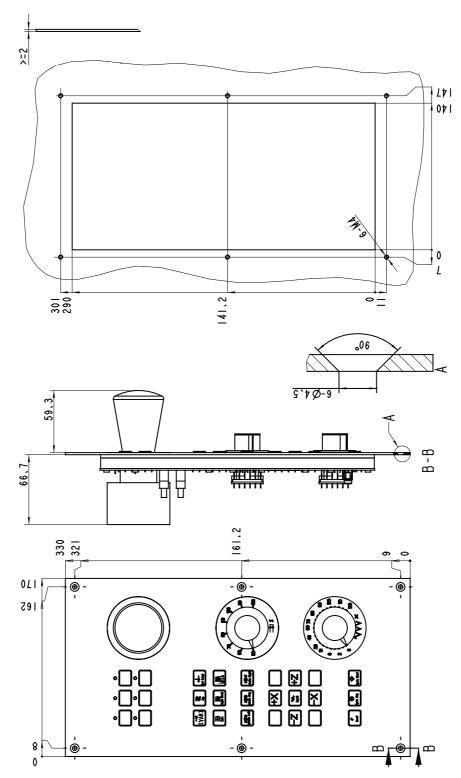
Dimension and hole drilling template of the machine control panel MCP
